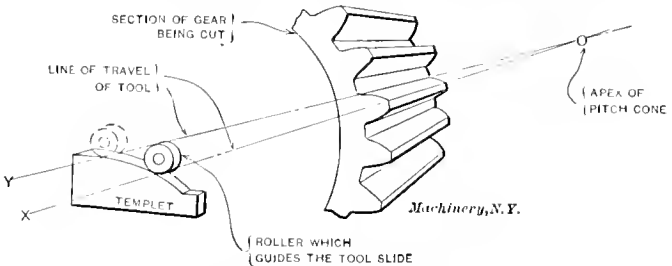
Diagram illustrating the Templet Principle for Forming the Teeth of Bevel Gears.
